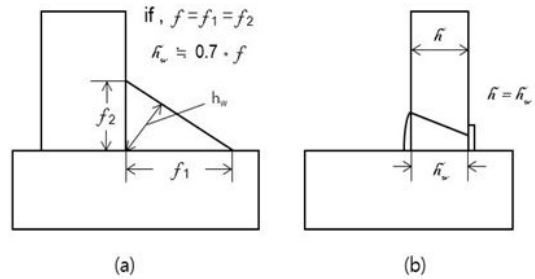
Examples of (a) T-joint welding (b) Cut-joint welding
